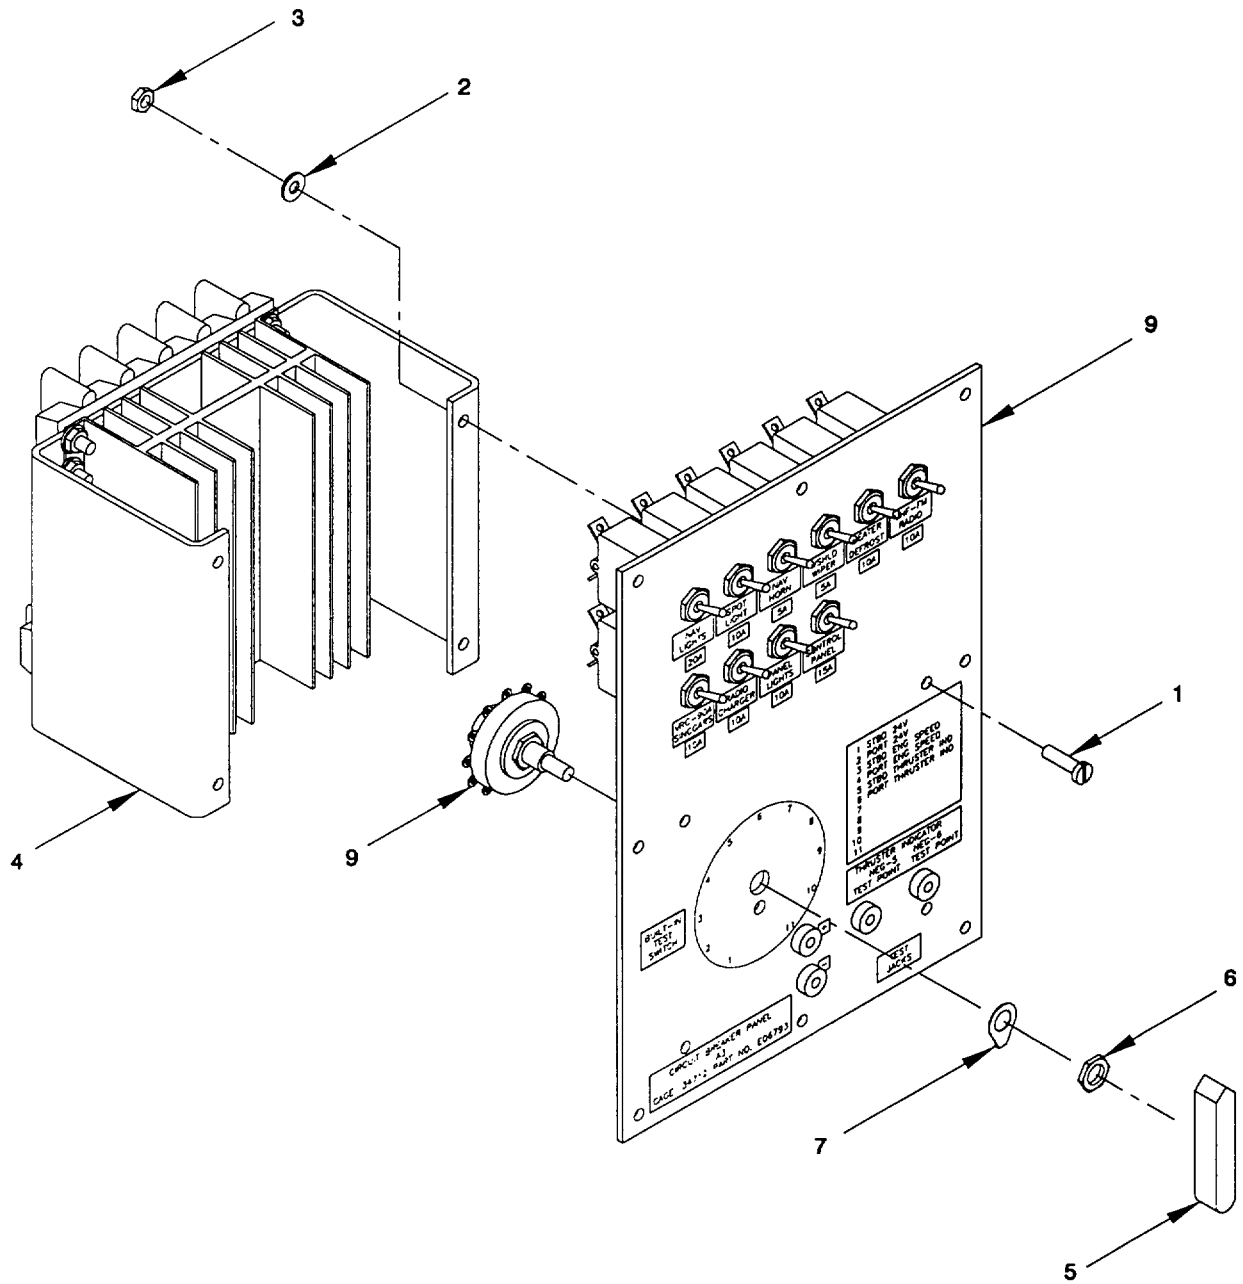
Rotary Switch, Operator's Cab Circuit Breaker Panel "A3", Remove/Install.
